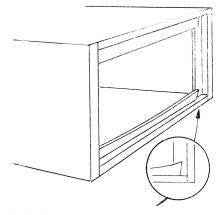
It is not even necessary for the bracing to run corner to corner.
